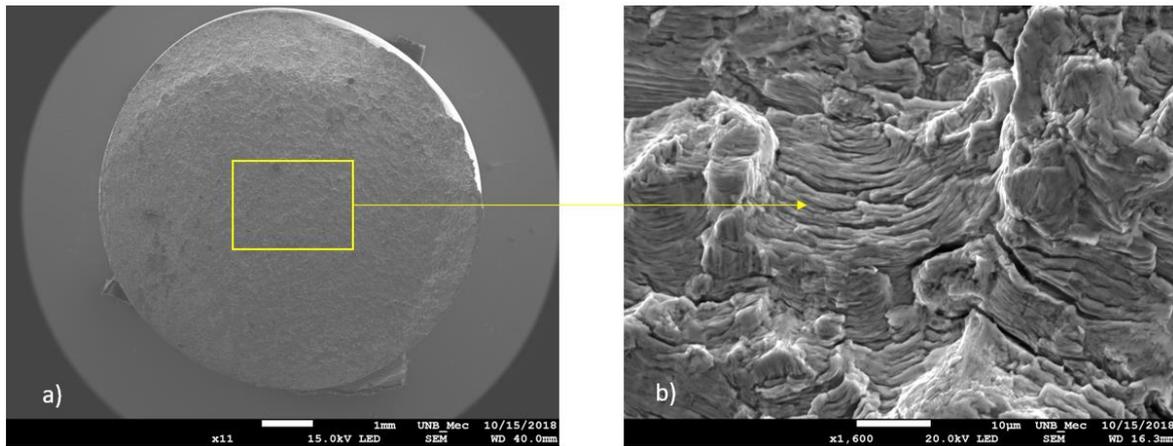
a) Surface of fracture of smooth specimens. b) Increased image of the crack propagation region showing fatigue striations. MEV.1600x
